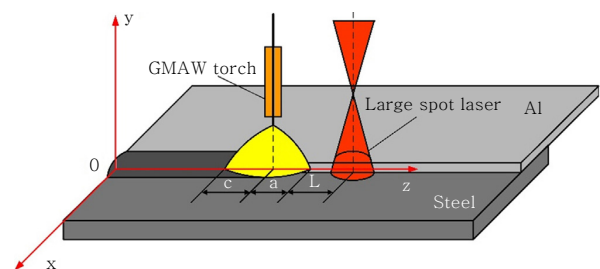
Schematic of laser + MIG arc brazing-welding experimental system⁹⁾
